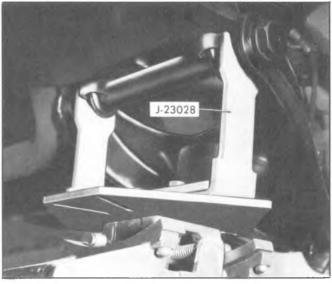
C-17--Removing Coil Spring with Tool J-23028
